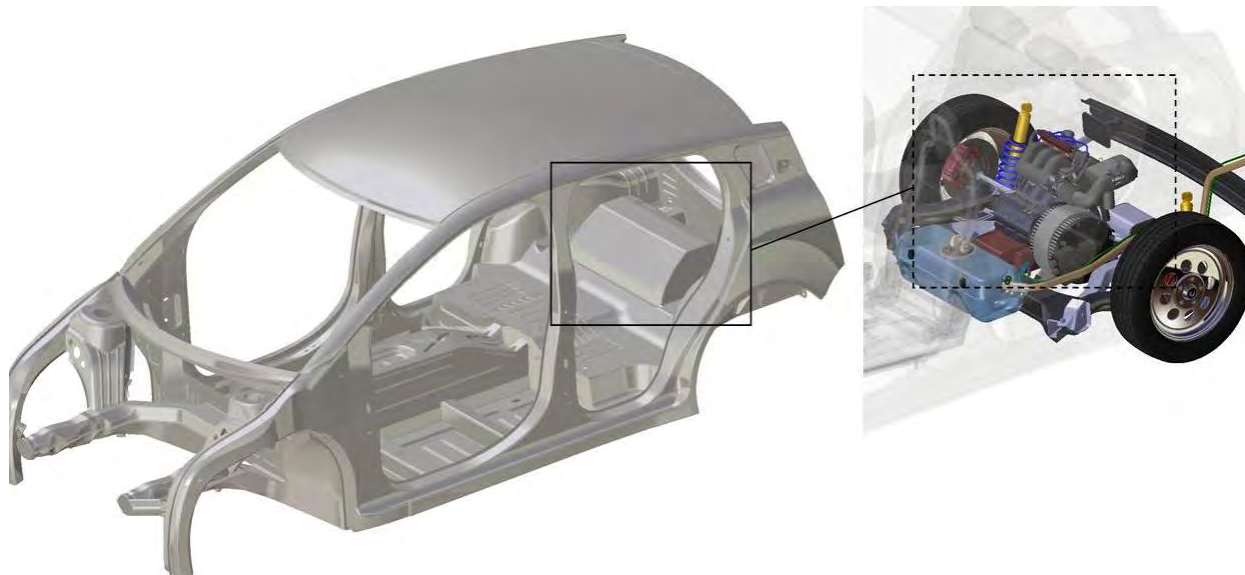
FSV-1 PHEV₂₀ engine/generator set packaging
